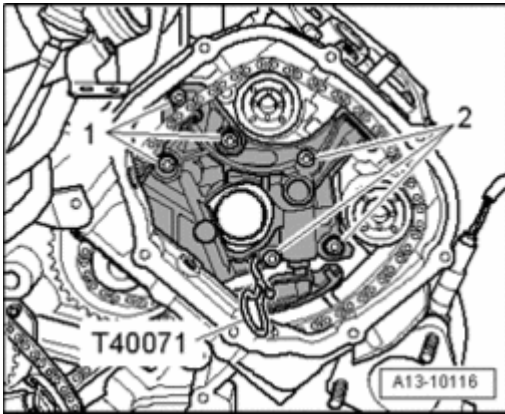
Identifying Bolts For Right Chain Tensioner And Right Camshaft Timing Chain
